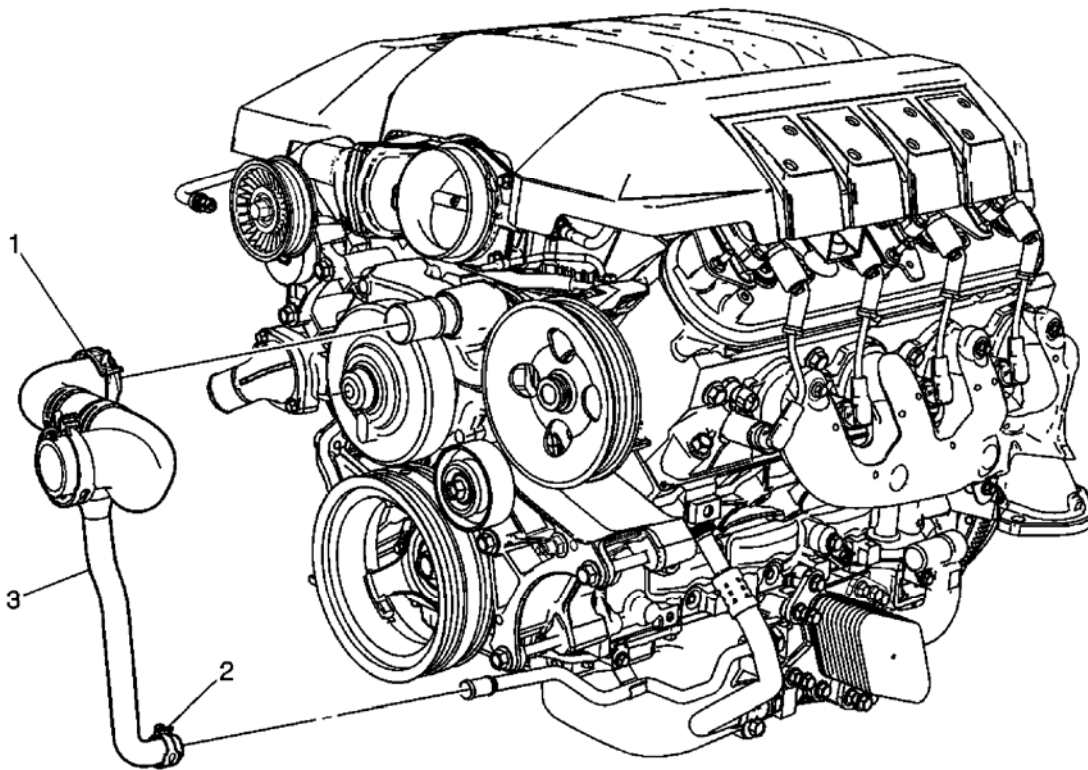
Radiator Inlet Hose & Clamp At Engine
